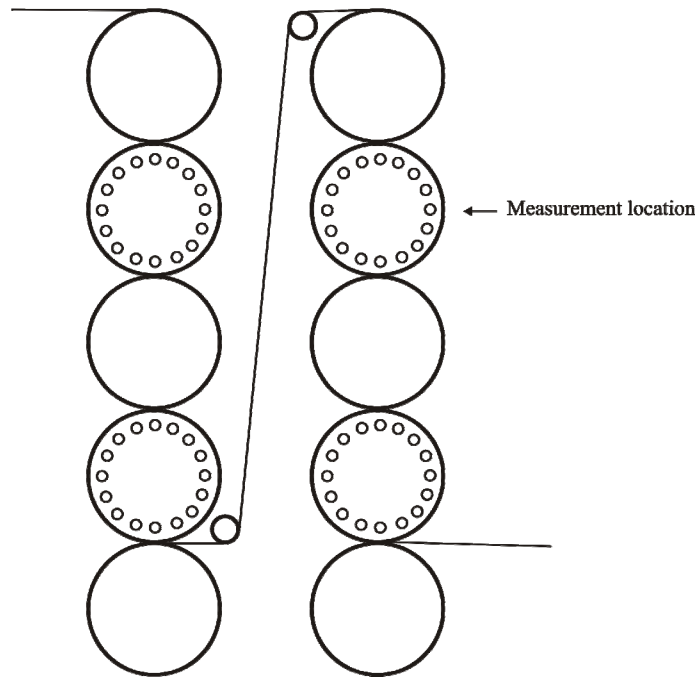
Basic layout of multinip calender roll stacks (case 3).
